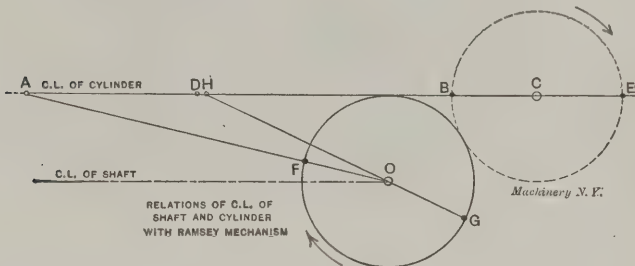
Novel Crank Arrangement for Internal Combustion Engines.
